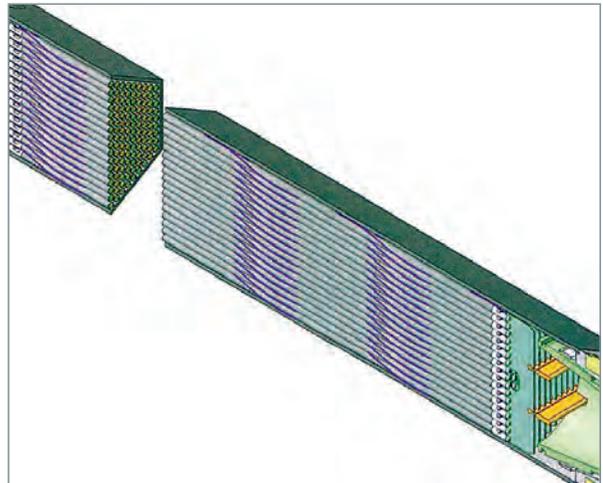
Exploded view of the central region of a 217-pin Phénix fuel assembly.
